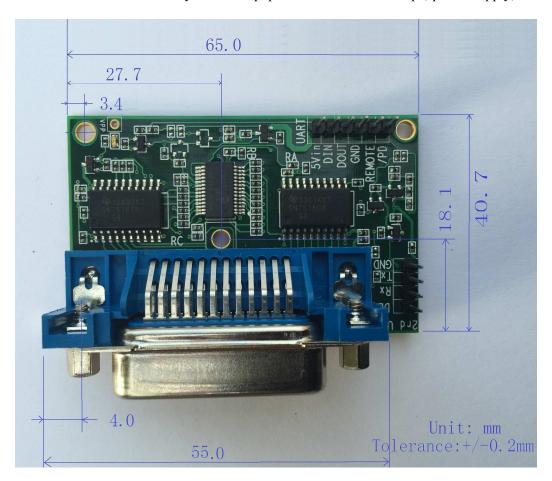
GPIB to UART Module Mechanic Size (top view)
